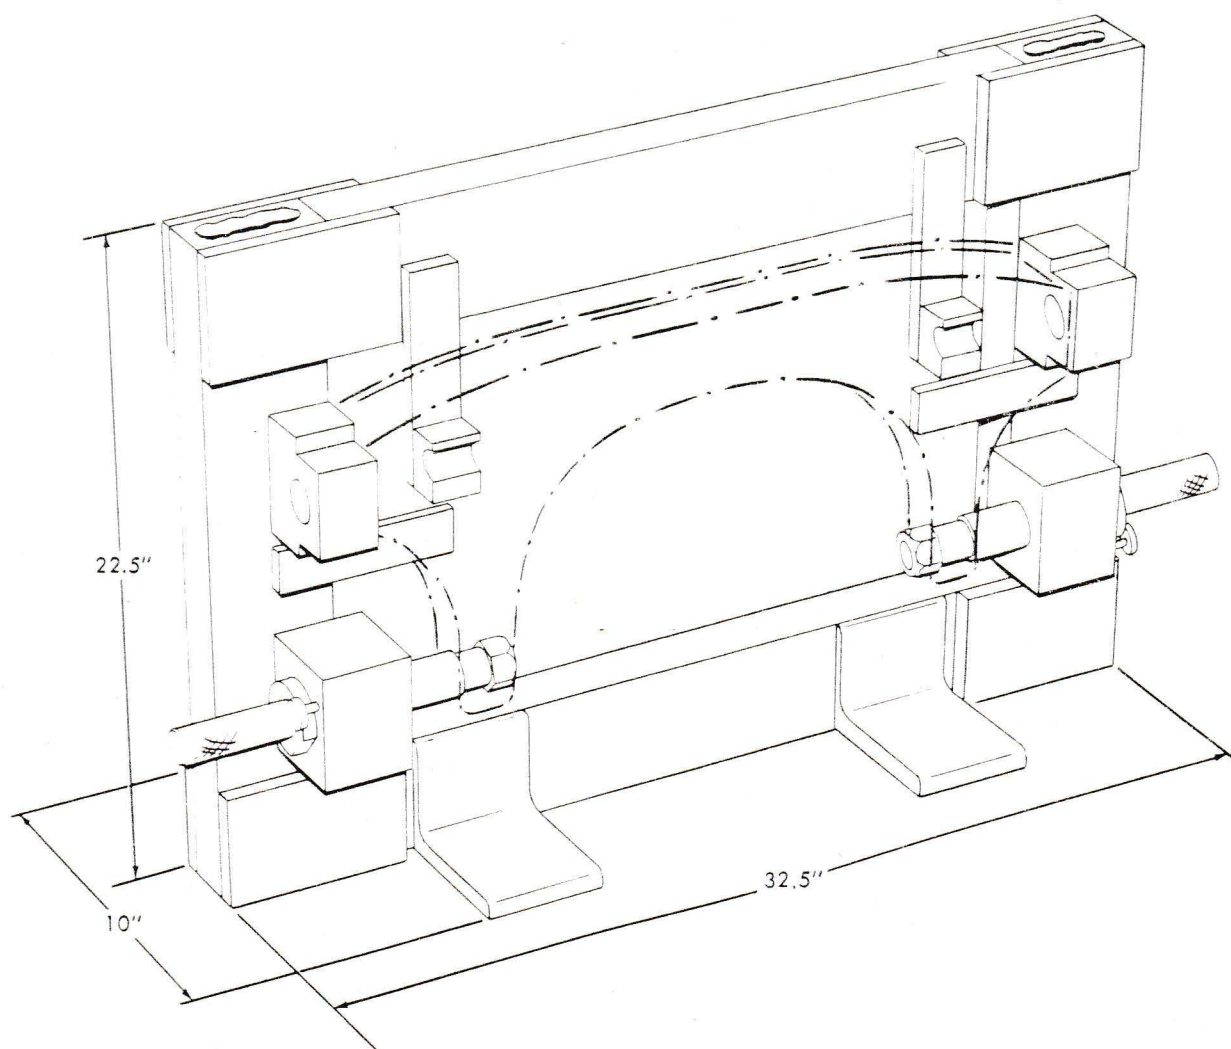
FINAL ASSEMBLY JIG FOR ENGINE MOUNTING YOKE
